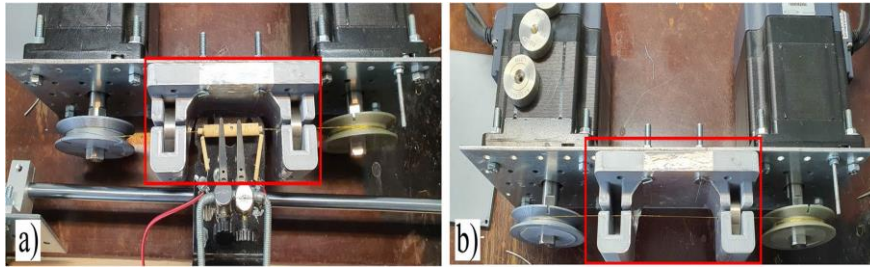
View of the experimental setup: a) drawing without a die; b) drawing with a die.
